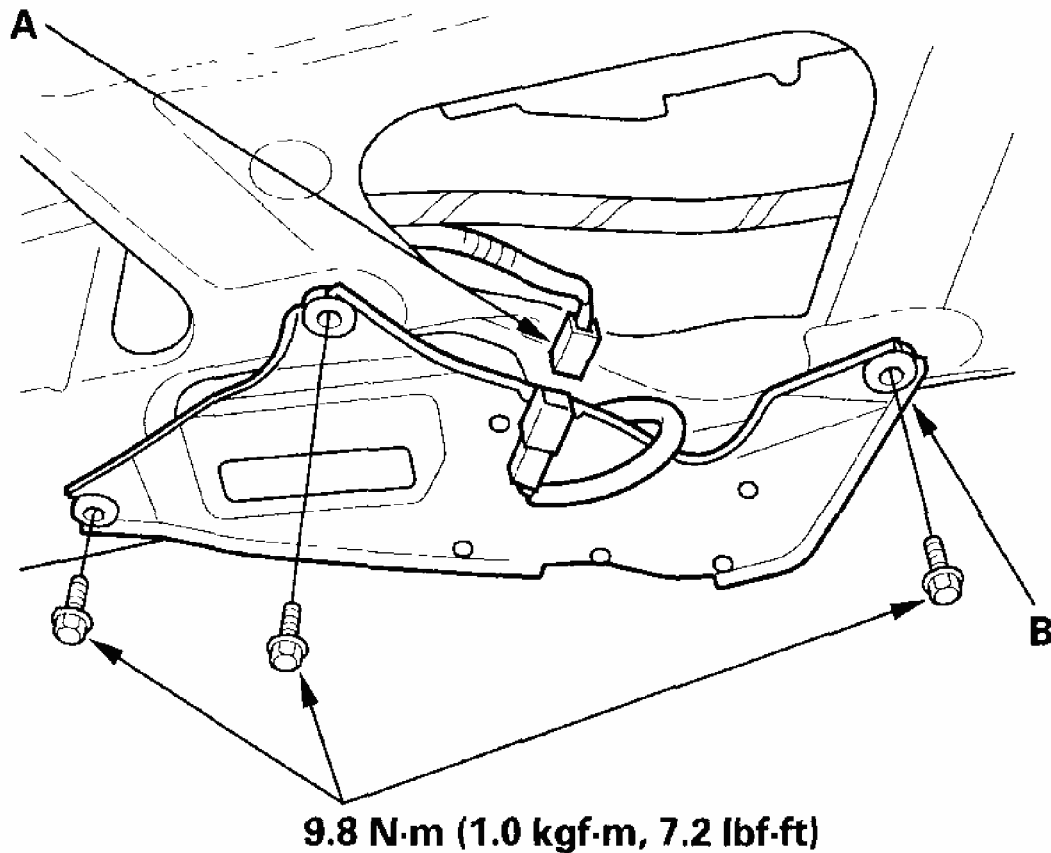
Removing Rear Window Wiper Motor Components With Specified Torque
